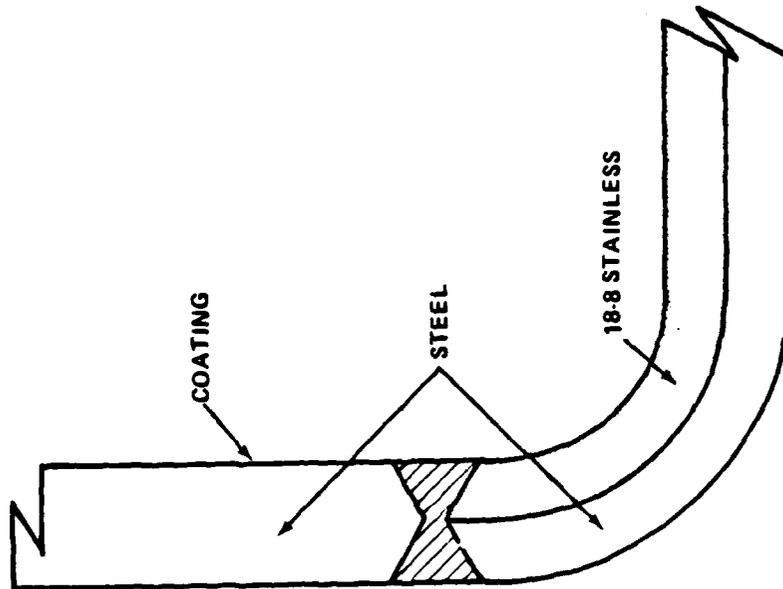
DETAIL OF WELDED STEEL AND STAINLESS CLAD TANK CONSTRUCTION
